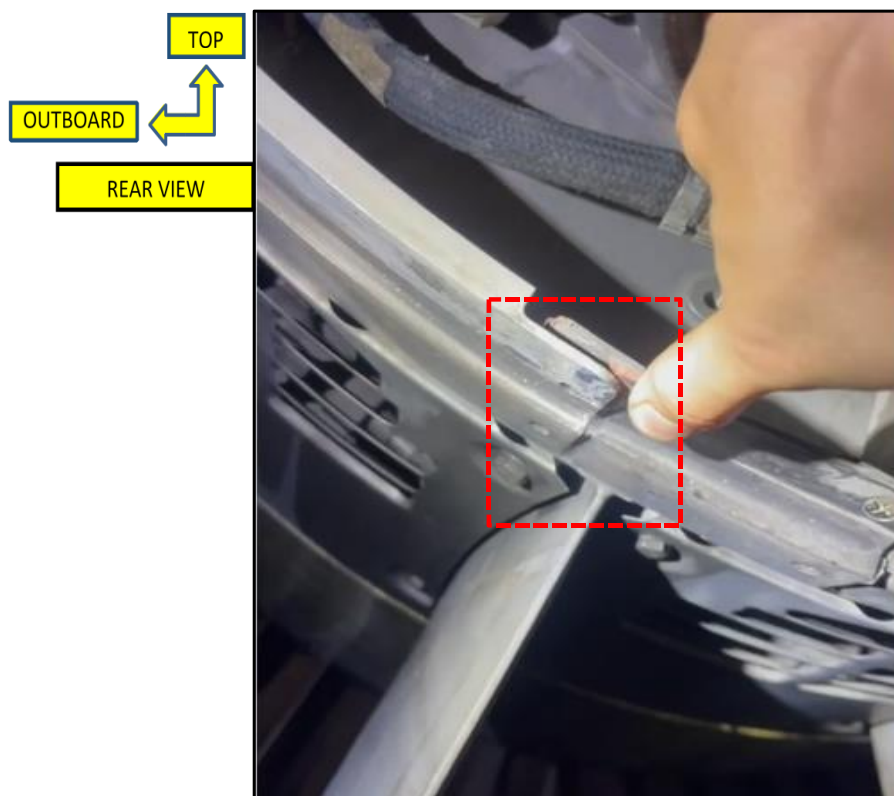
Engine No. 1 Flange Aft of VBV Rivet Pop-Out
